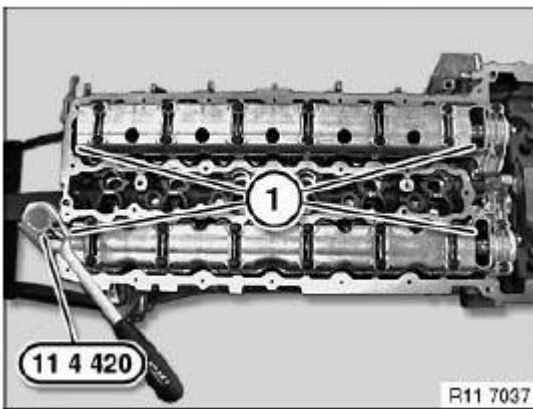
Releasing M9 Cylinder Head Bolts Using Special Tool (11 4 420)
